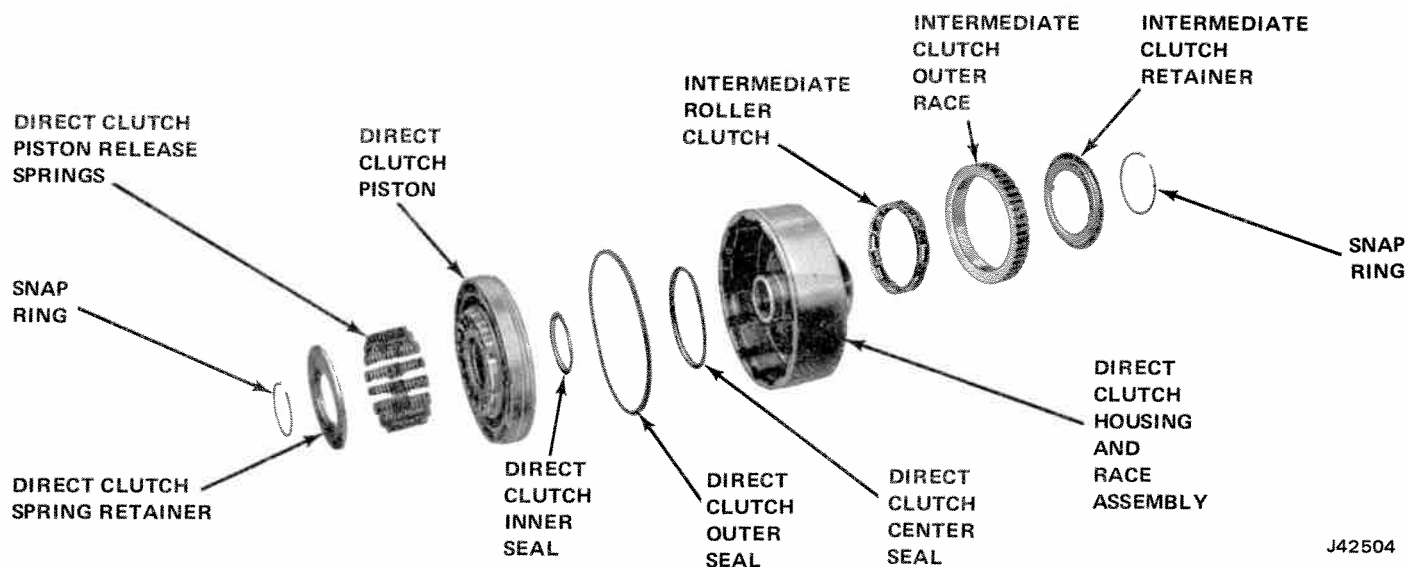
Intermediate Clutch, Roller, and Direct Clutch Components
